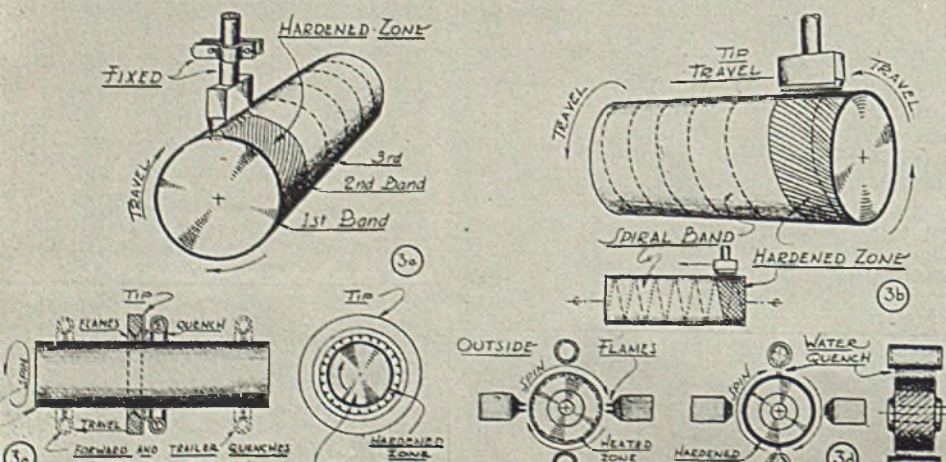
These four diagrams illustrate the four techniques for flame hardening cylindrical surfaces. Slow-rotation progressive methods, 3a and 3b, are generally used for large diameter objects, while the spinning methods, 3c and 3d, are better adapted for handling production work. The four techniques are known as progressive circular-band hardening, 3a; progressive spiral-band hardening, 3b; band spinning, 3c; and progressive spinning, 3d
